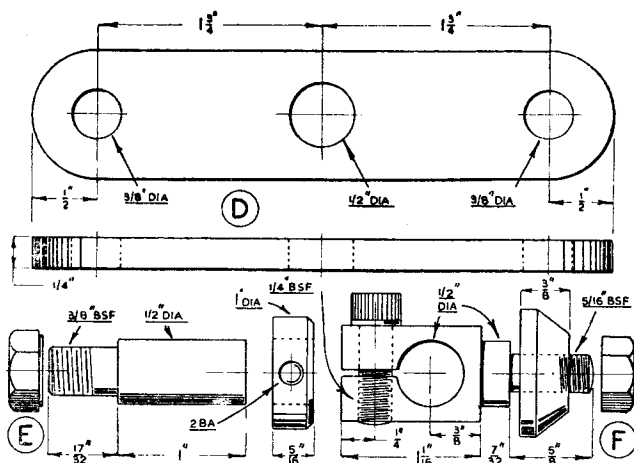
D—the jockey pulley plate; E—the pulley stud; F—the shaft clamp
